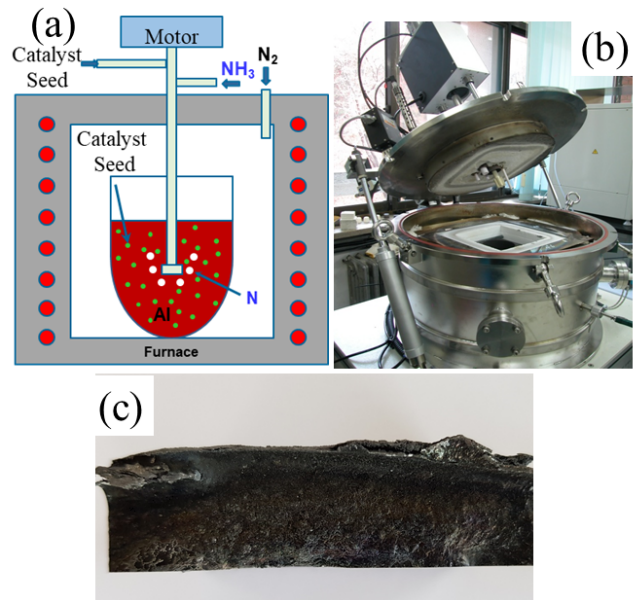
Gas-Melt reactor system, (a) The schematic drawing of mechanism of melting machine, (b) Melting machine for high temperature and pressure casting (c) Photos of as-cast samples of Al-AIN composites
